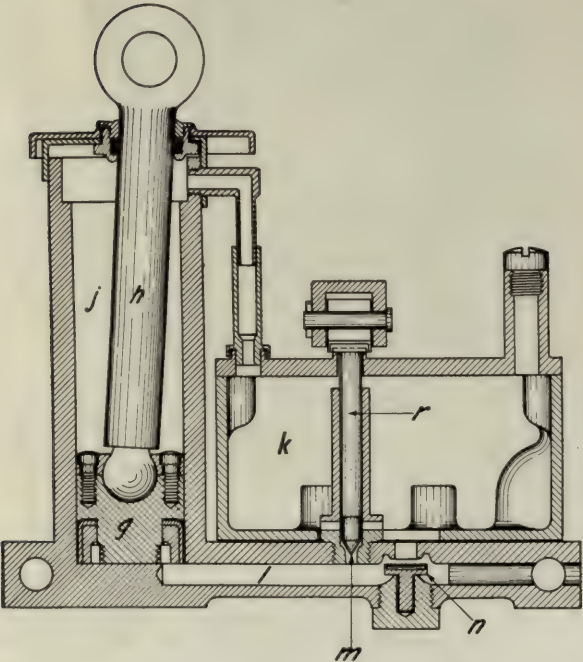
Details of Oil Cylinder of Hold-Clear Mechanism.
